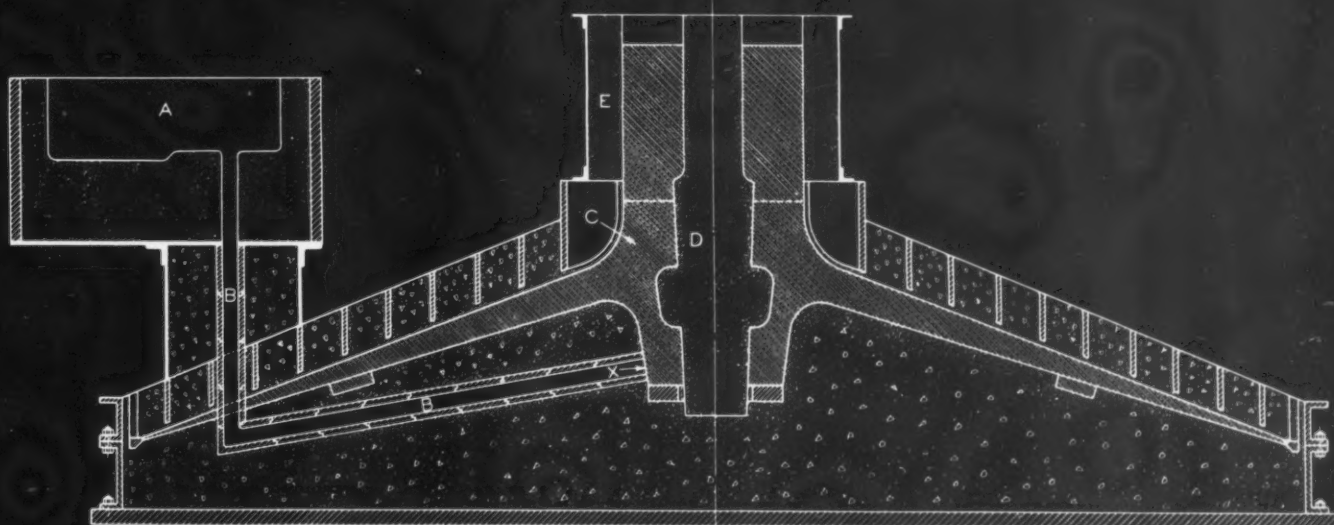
Cross-sectional Drawing of a Propeller Mold, Showing Pouring Basin, Shrink-head, and Gate Arrangement
